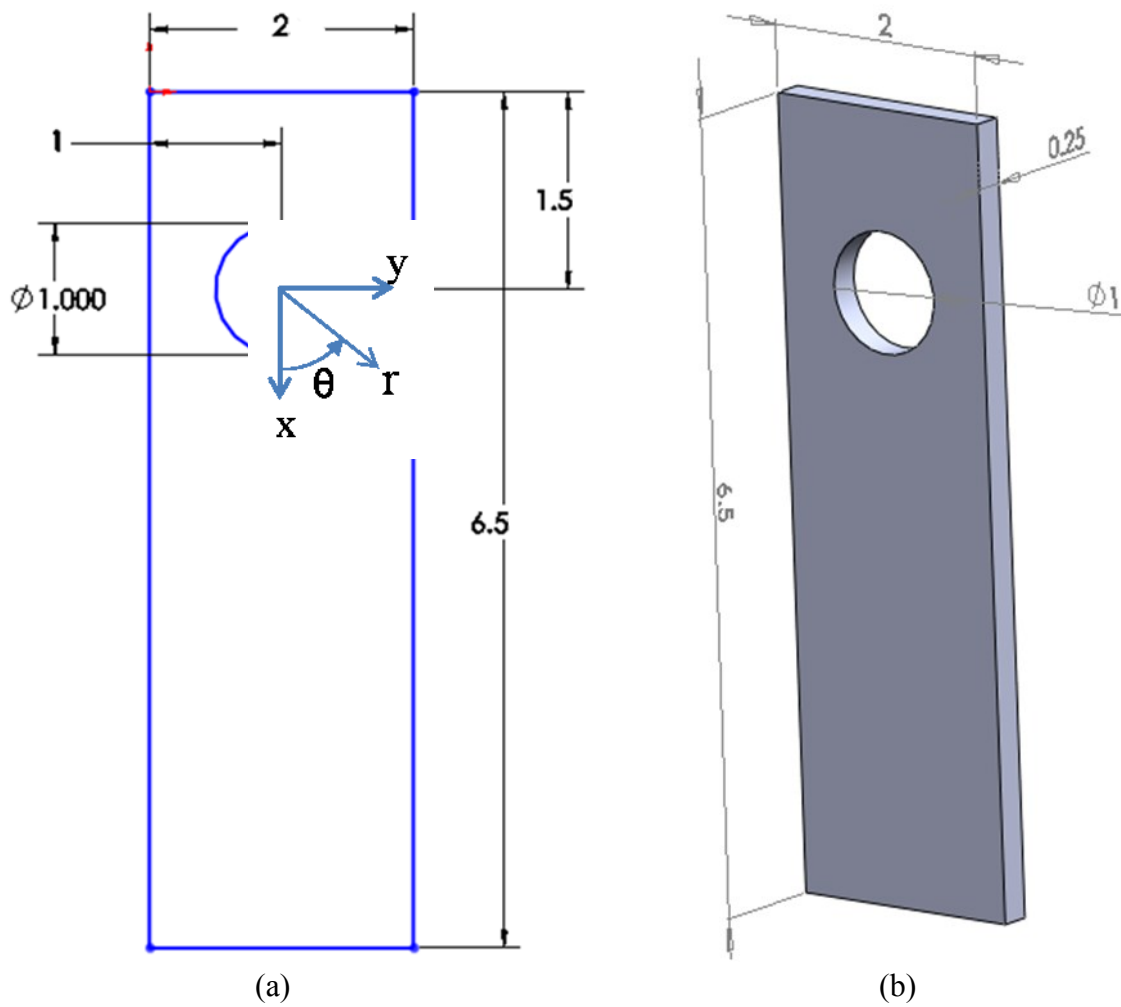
2D sketch of test specimen (left) and 3D CAD model of test specimen (right)
